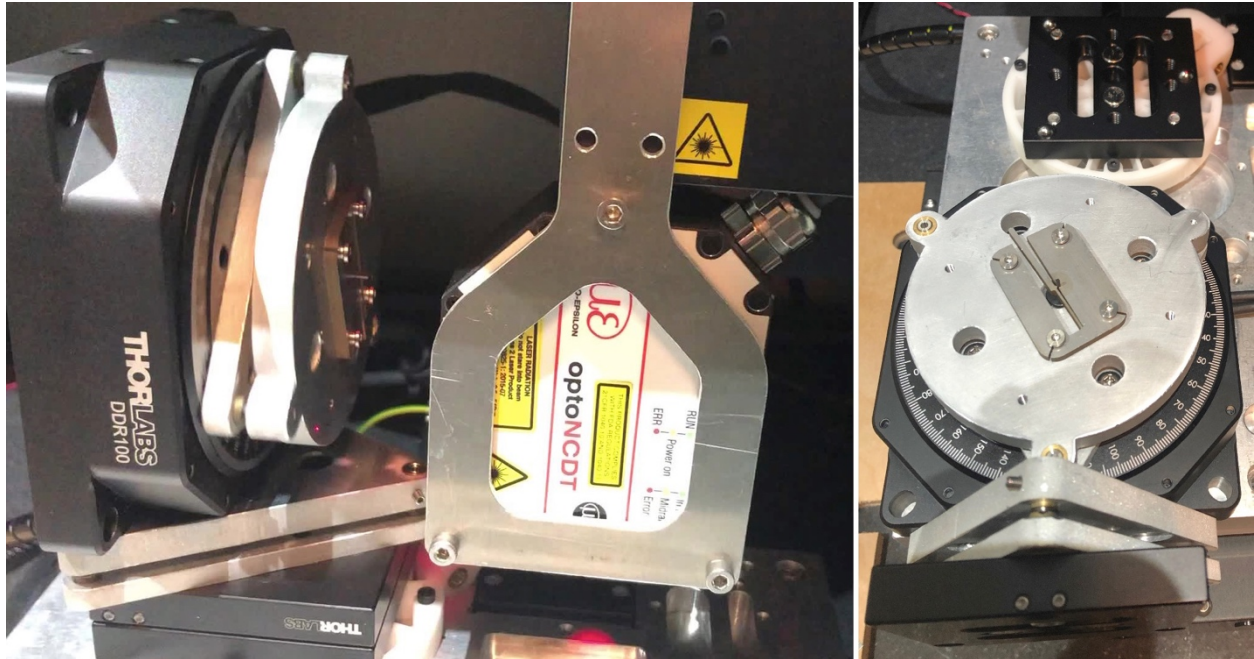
“Micro-lathe” assembly in Oxford laser cabinet. (Left) The apparatus is in “lathe” mode which is used to machine the outer diameter of the rotor. The Micro-Epsilon laser micrometer is used to dial in the tilt, yaw, and runout of the rotary stage. (Right) The apparatus is in “turntable” mode which is used to machine the inner diameter of the rotor. Switching between the two modes can be easily accomplished using the magnetic kinematic base.
